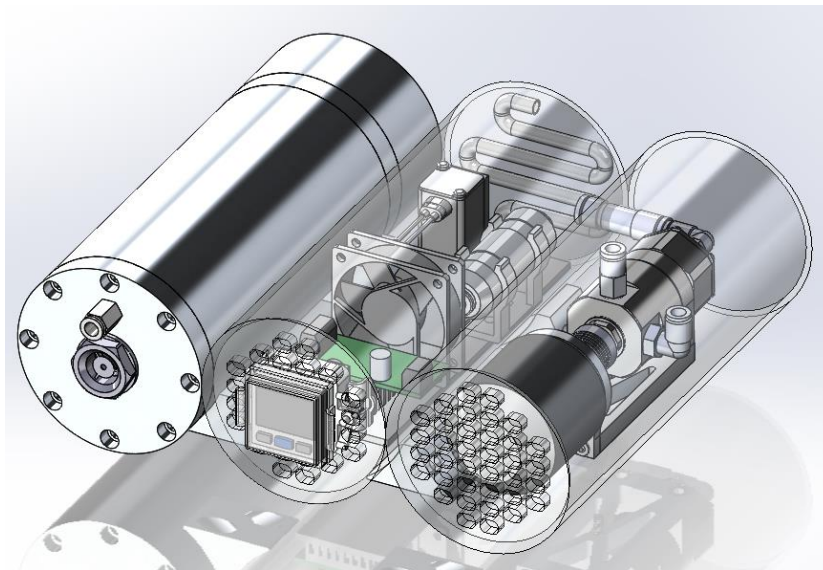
CAD view of the conical screw compressor VERT.04: Water separator / pressure vessel (left), module with heat exchanger and electronics (centre), module with compressor (right)
